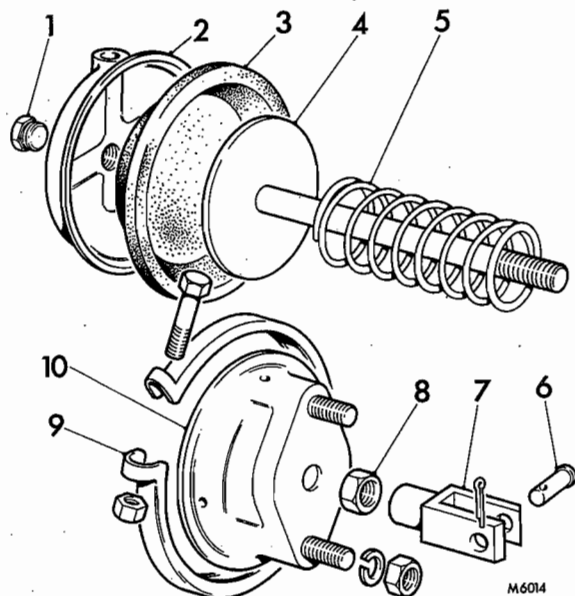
EXPLODED VIEW OF DIAPHRAGM BRAKE CHAMBER
